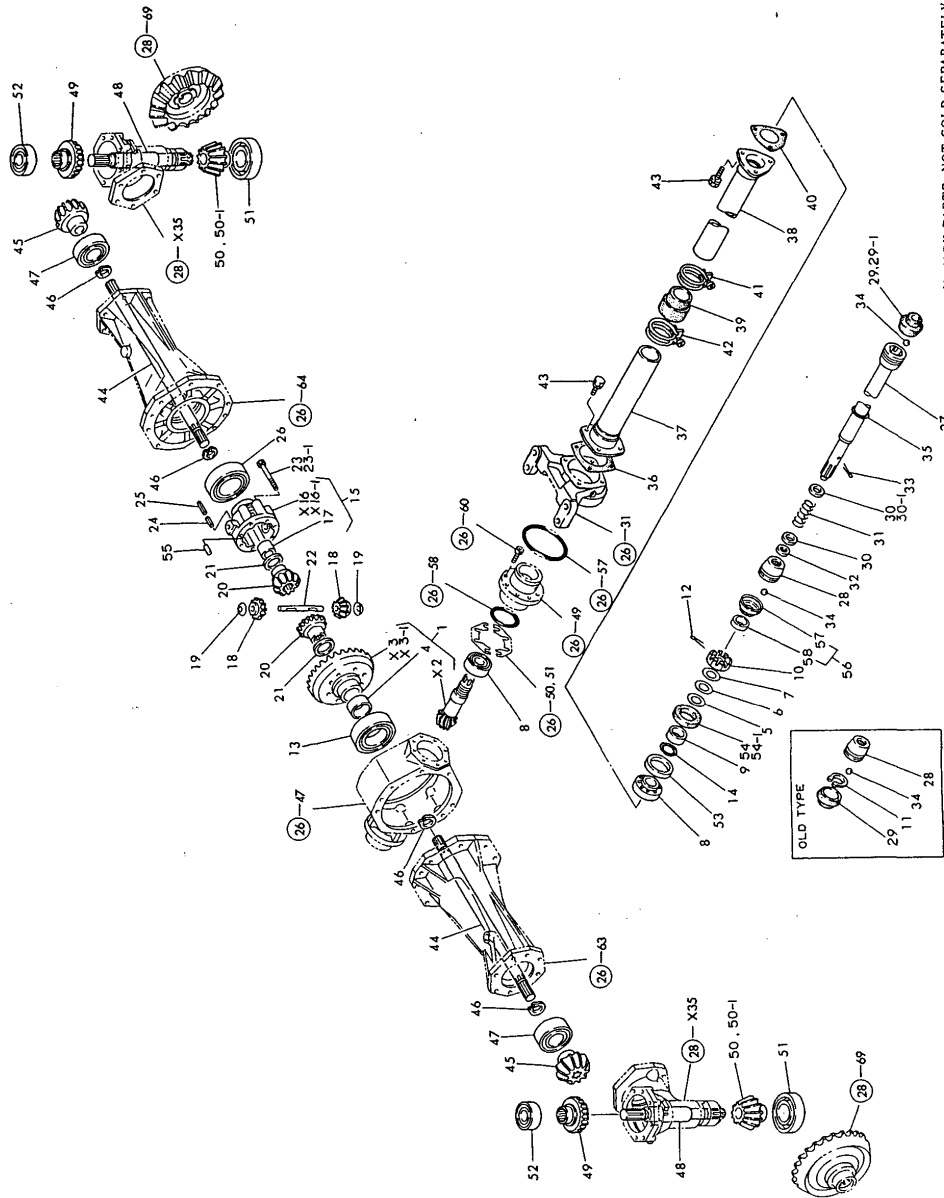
FRONT AXLE (B) [FOR MODEL YM4300DT]
